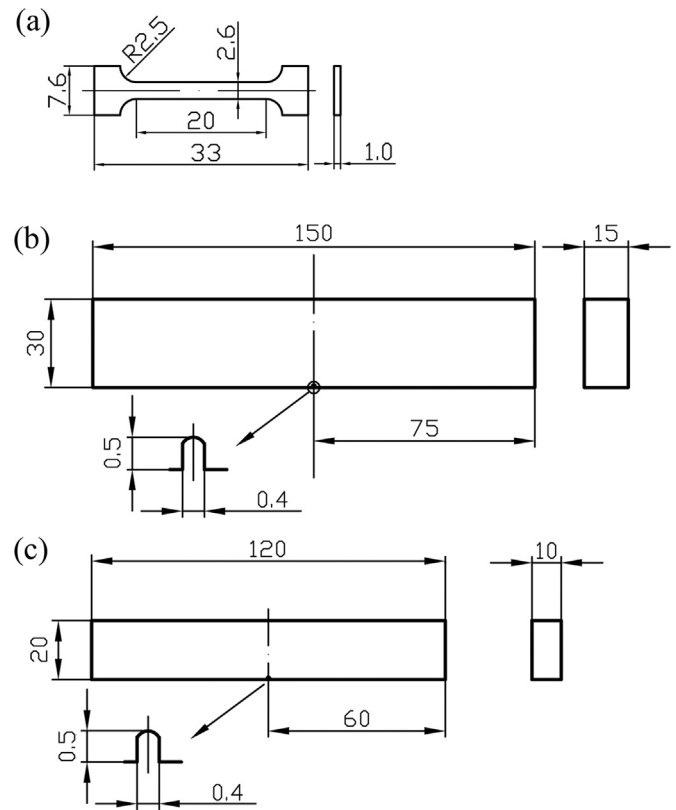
Specimen shape and dimensions (in mm). (a) For tensile testing, (b) for SAL fatigue testing (loading span 120 mm) and (c) for CAL fatigue testing (loading span 80 mm).
